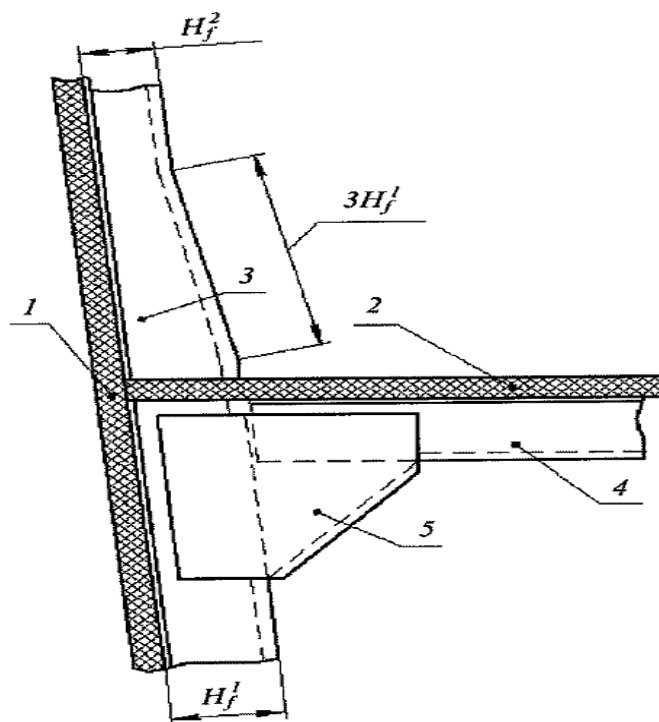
Joint of the frame and intermediate deck (platform) beam:
